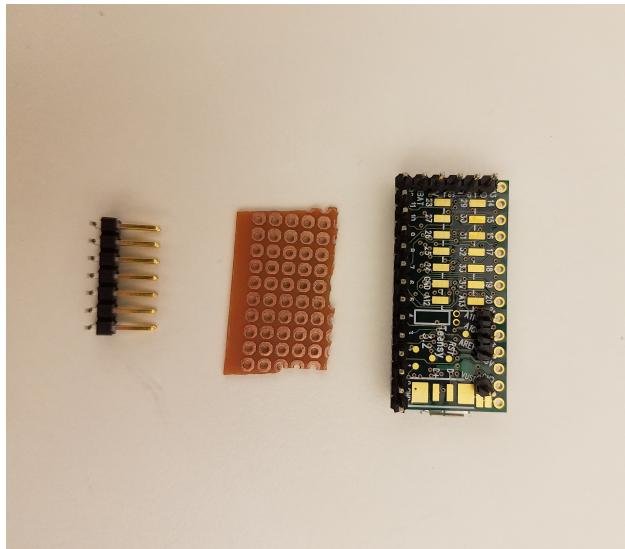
The 14 position surface mount header, perforated board, and Teensy required to make the underside pins of the Teensy accessible.
